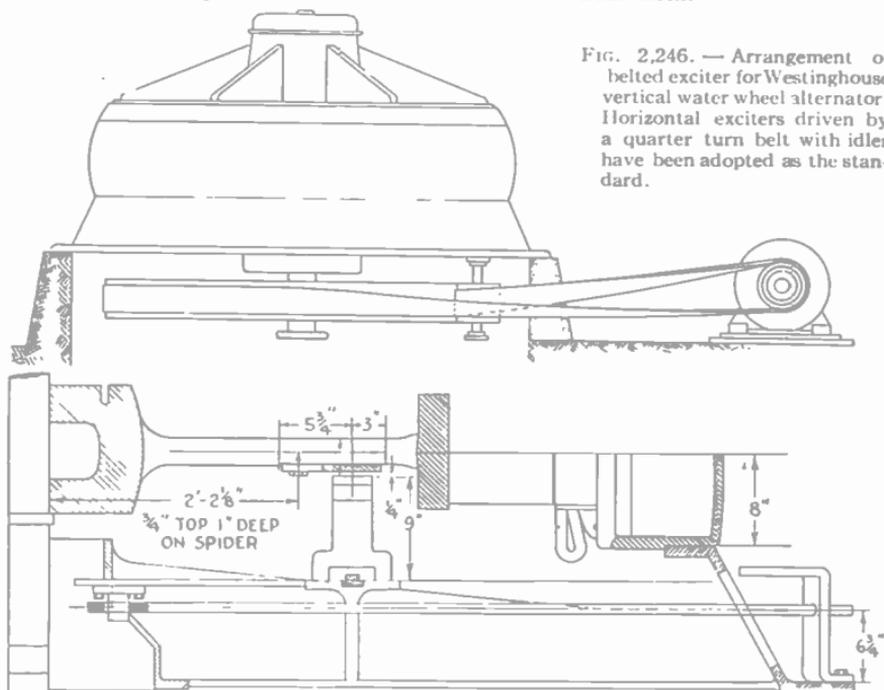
,247.—Arrangement of hand operated brake of Westinghouse vertical water wheel alternator. The brake shoes are supported on pads cast on the lower guide bearing bracket arms and have the operating rod extending to a hand wheel outside of the alternator frame.
